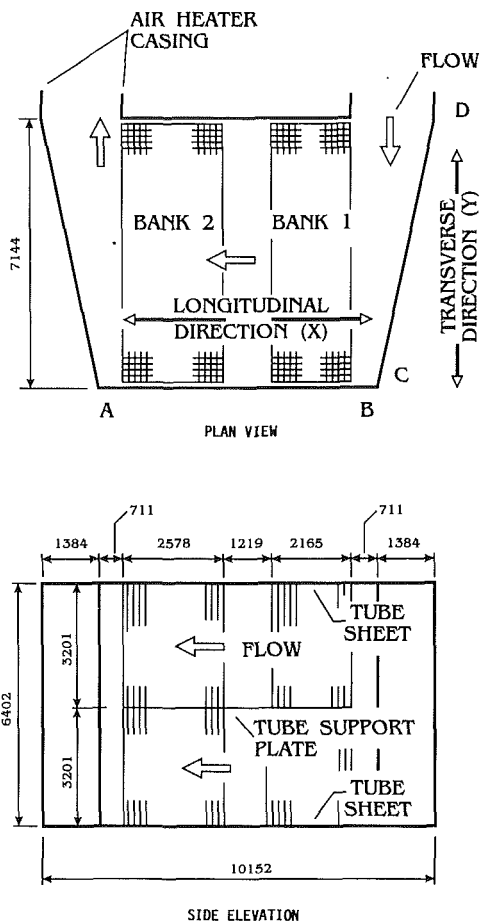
Arrangement of tubular air heater (dimensions shown in mm)
